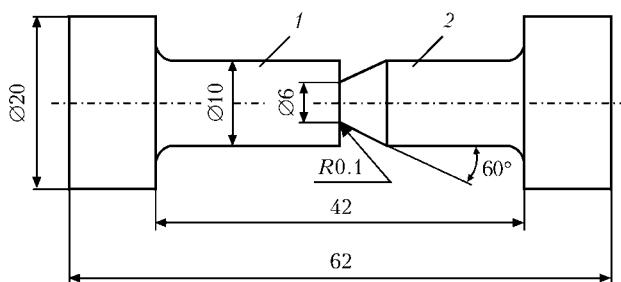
Sketch of specimen for testing on static tear: 1 – copper; 2 – steel part
